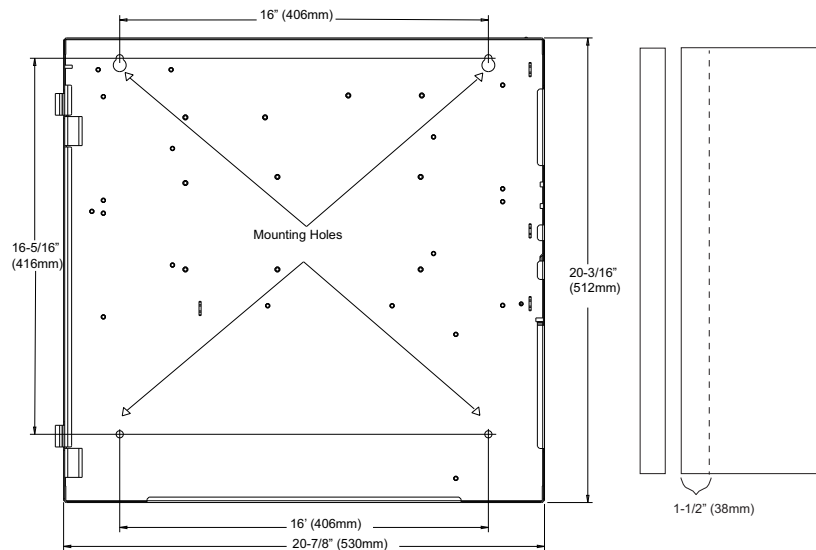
Back Box Installation dimensions and Semi-Flush Mounting (Right)
